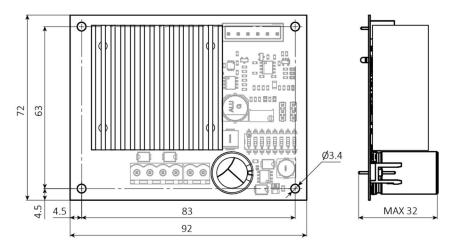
Dimensions of stepper motor driver SMD-2.8 open frame version
